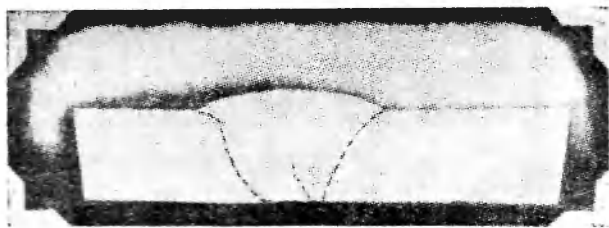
Welded joint in 12.0 mm plate made with copper backing. Single V with copper backing. Groove angle  $60^\circ$ , root gap 1.0 mm, root face 3.0 mm, backing bar  $50 \times 10$  mm, Parameters: 850 A, 35V, 23.5 m/hr.  $\psi=1.93$ ,  $\phi=10.55$  wire Diameter=5.0 mm Flux=VUZ 42 Mn.
